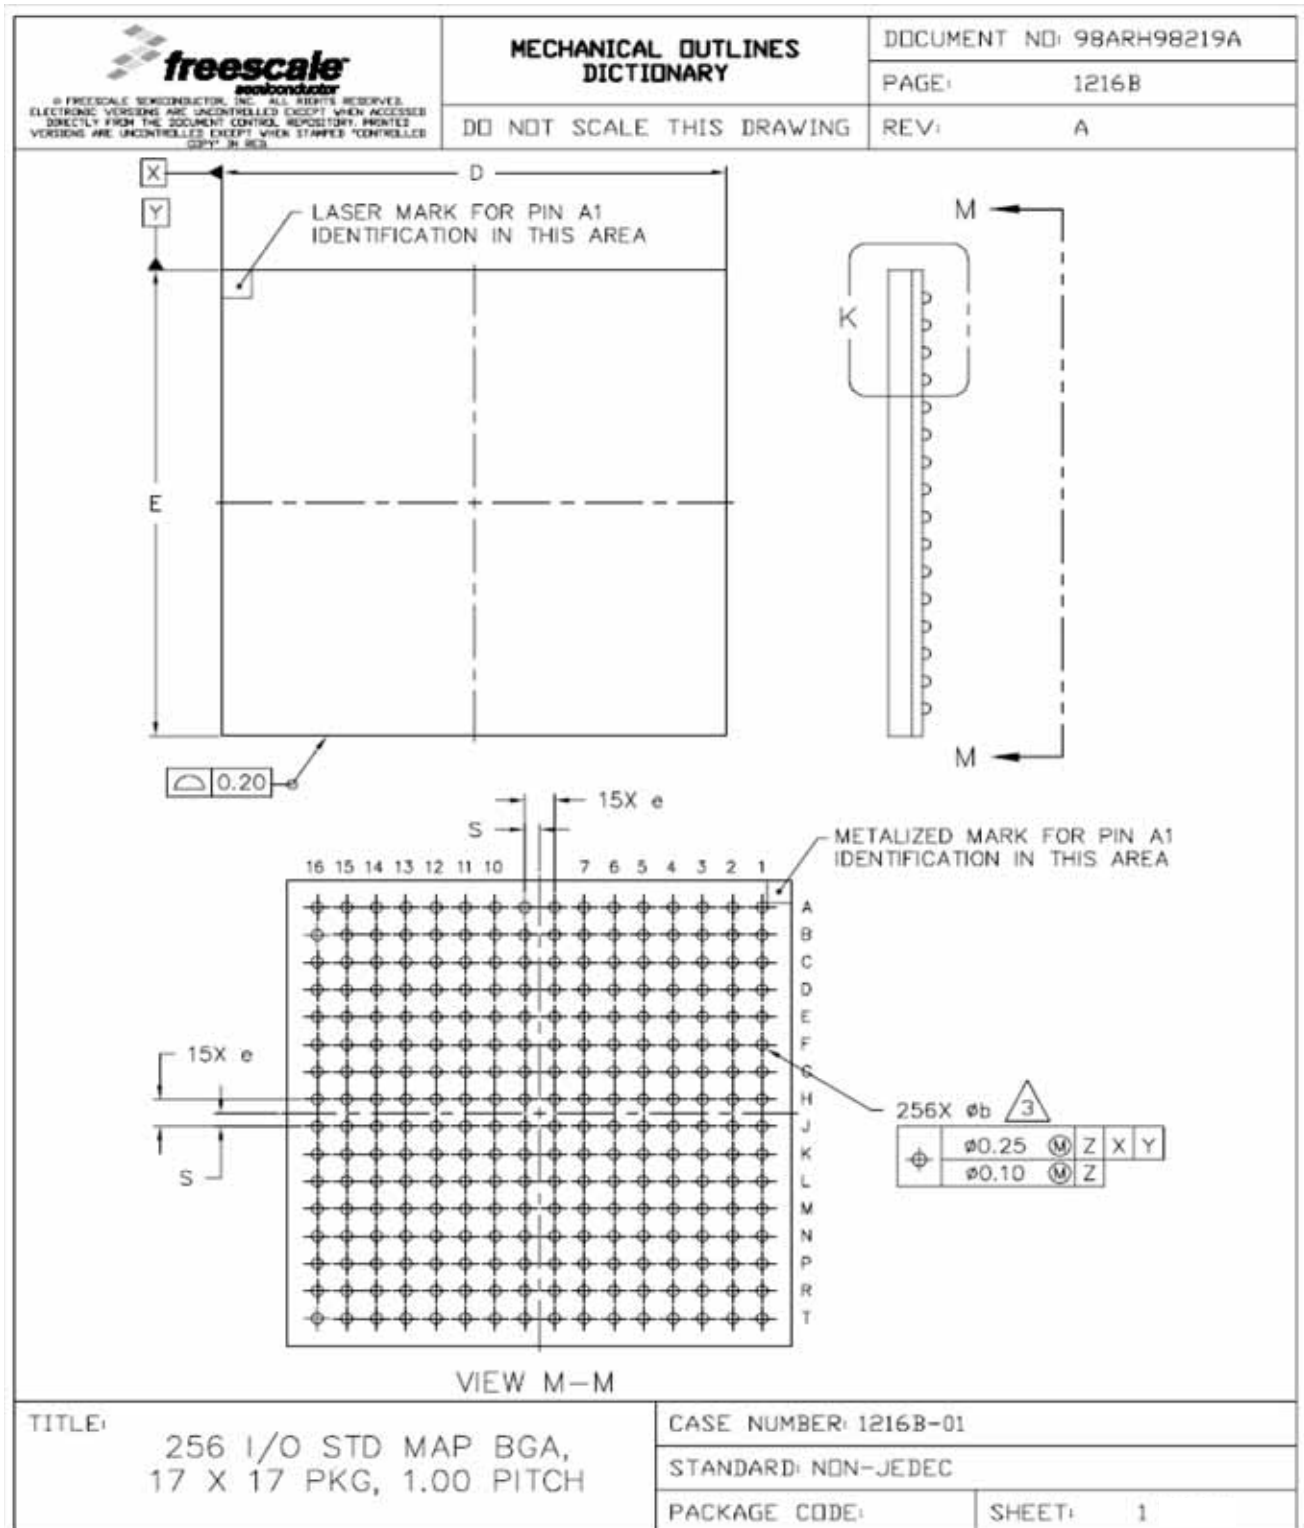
256 MAPBGA mechanical drawing (Part 1 of 2)
